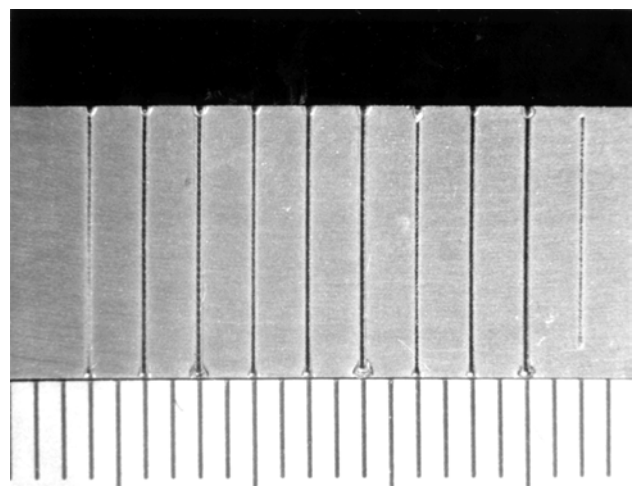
Laser welding on the aluminum surface (millimetric divisions).
